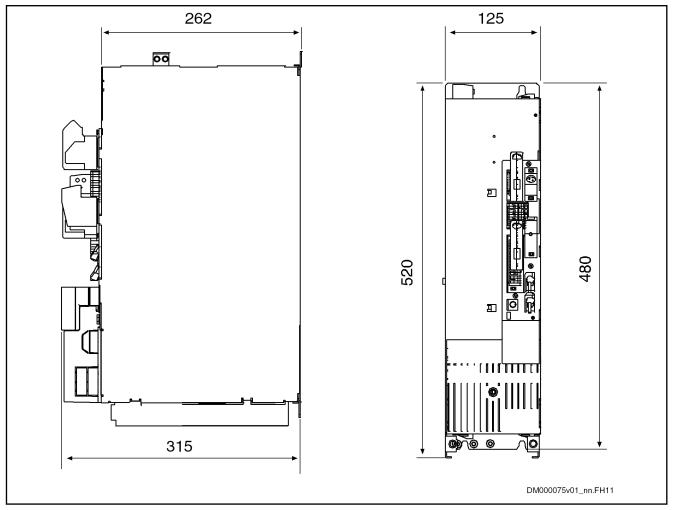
Dimensional drawing HCS03.1E-W0070
